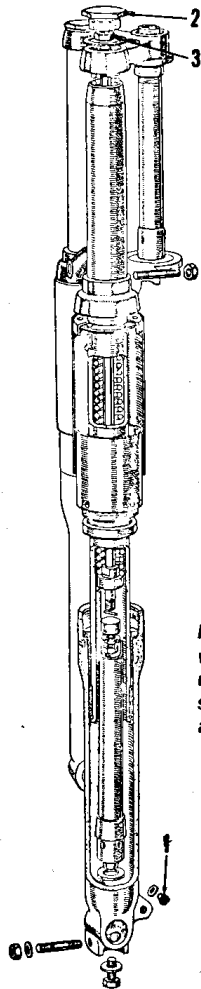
Cross sectional view of front suspension unit used on early models. Drain screw is shown at 1. Plug (2) and nut (3) must be removed to service unit.
